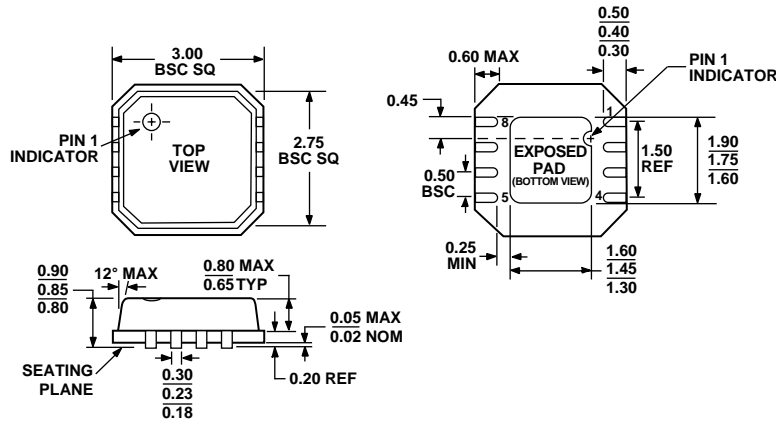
8-Lead Lead Frame Chip Scale Package [LF CSP], 3 mm x 3 mm Body (CP-8-2)—Dimensions shown in millimeters
